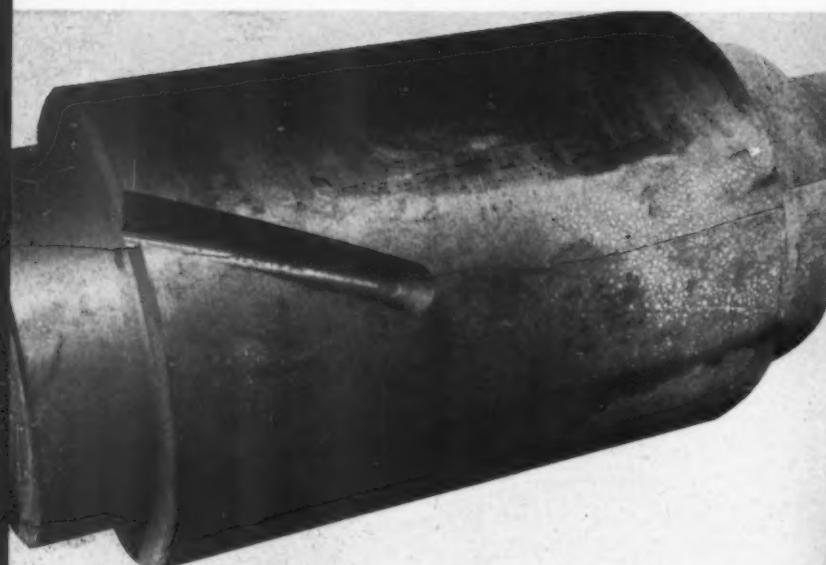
Above—Improper heat treatment caused residual stresses which cracked this semimachined forging of a rolling mill drive pinion when the initial cut was made for the pinion teeth. Internal structure is shown in Fig. 72
